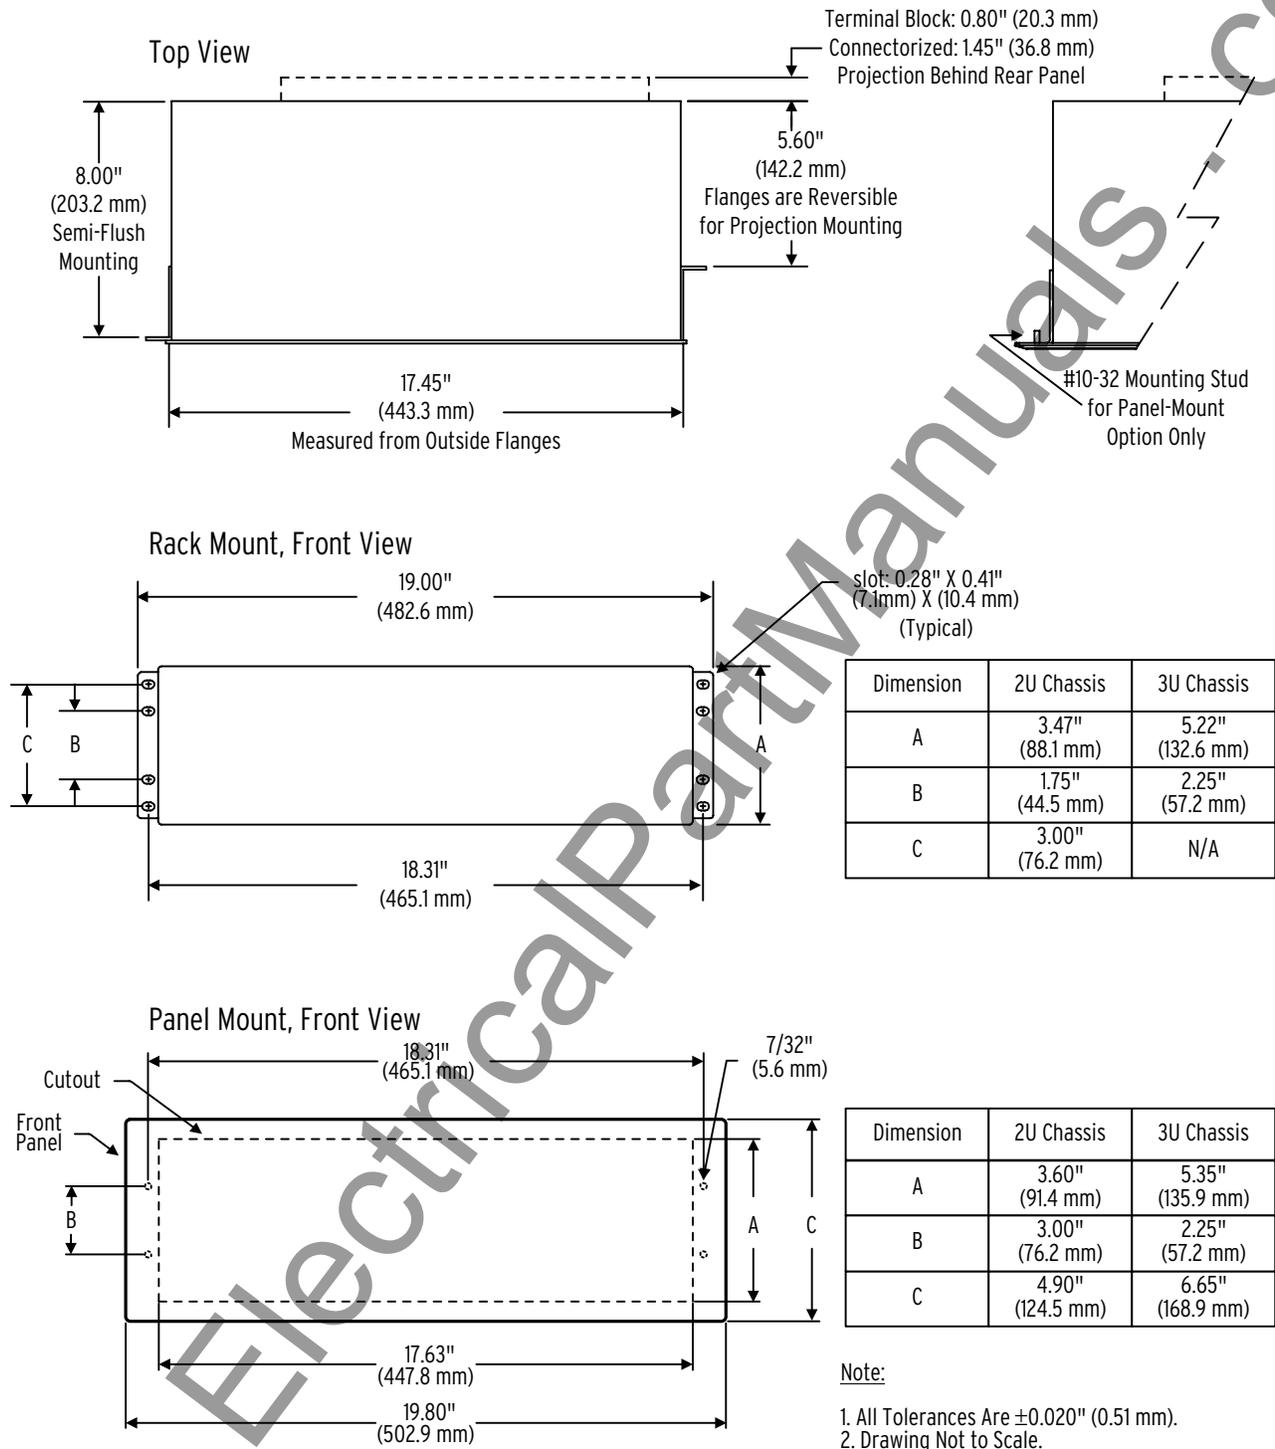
SEL-300G Relay Dimensions for Rack- and Panel-Mount Models.
